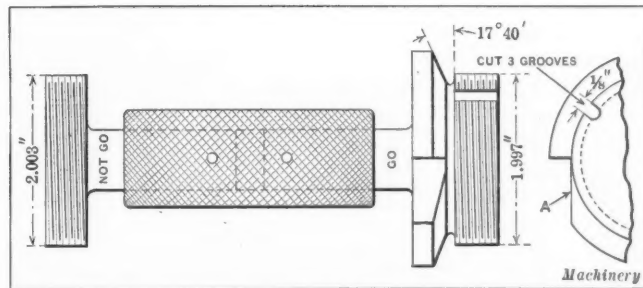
Double-end Limit Plug Gage having Beveled Shoulder for inspecting Chamfered Thread Hole
